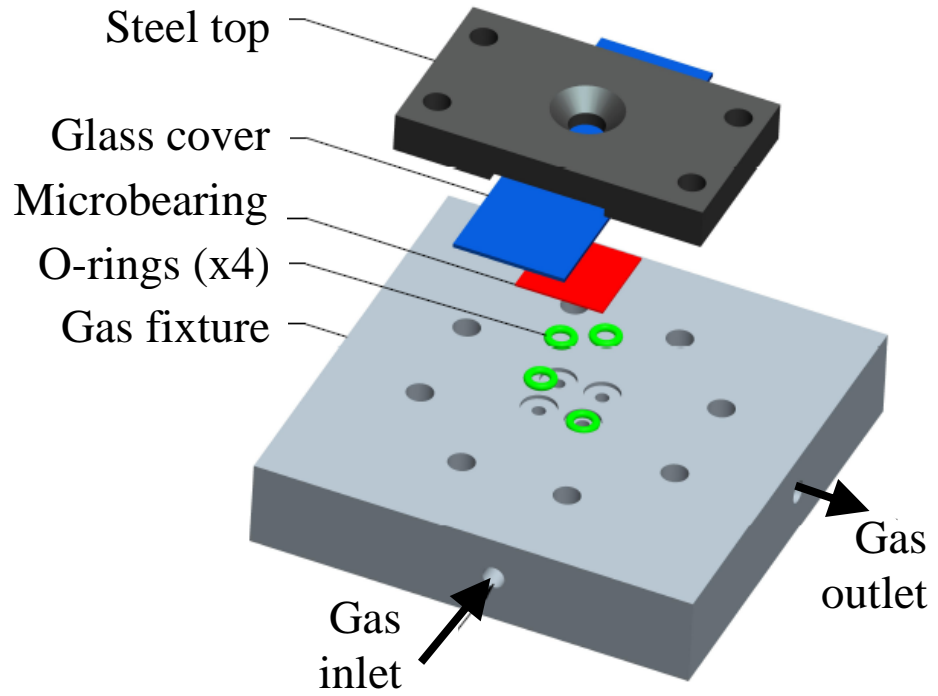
Exploded-view of Phase 1 microbearing test fixture.
